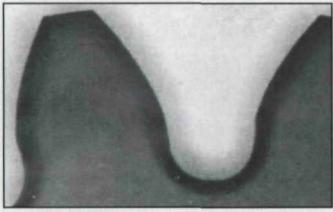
Macrostructure of gear test piece carburized with the gears shown in Figure 9. The test piece has five teeth, a module of 12 and is made of SCM420H, a JIS material specification.
